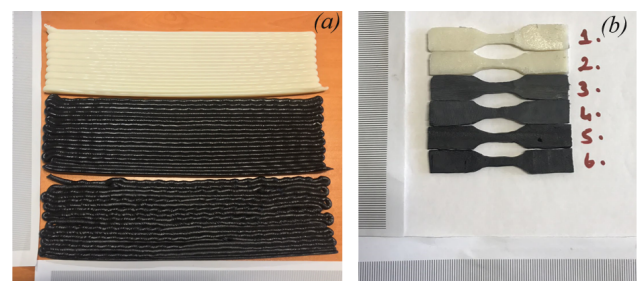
The tensile test samples a) before and b) after the CNC milling machine process
